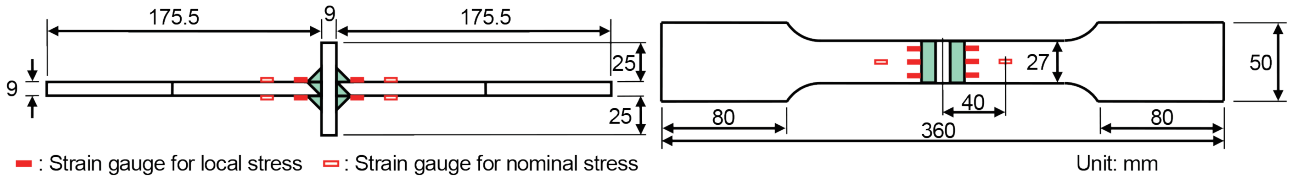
Schematic illustration of cruciform welded joint test specimen⁴⁾
